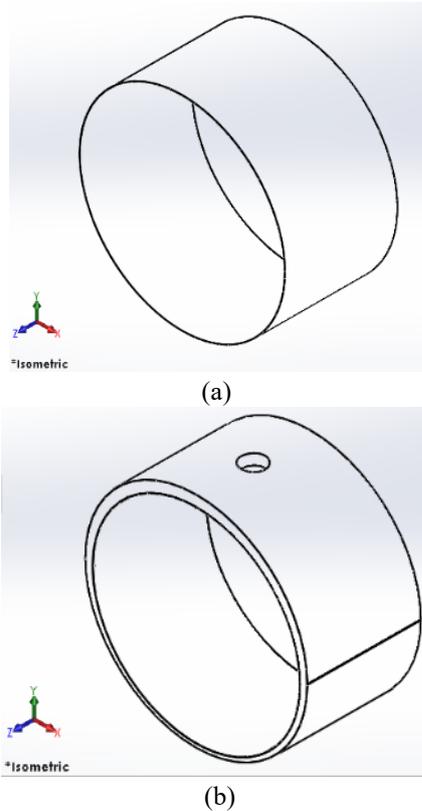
Modeling journal bearings (a) film oil (b) bearings.
